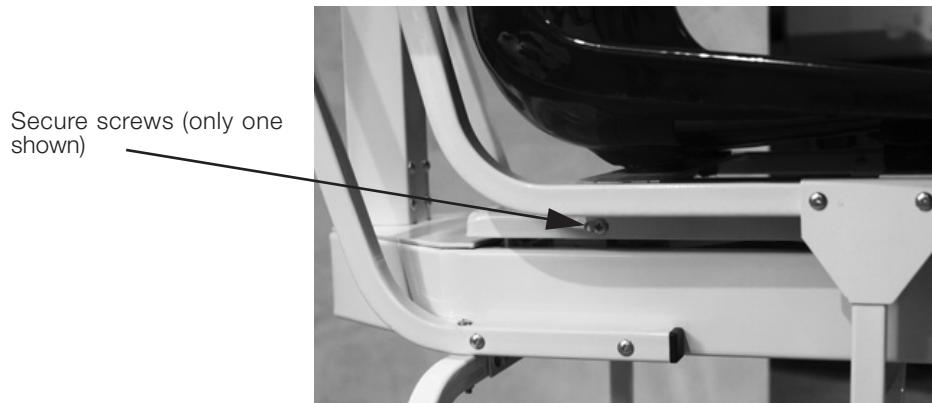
These Screws Hold The Molded Chair to the Scale Base
